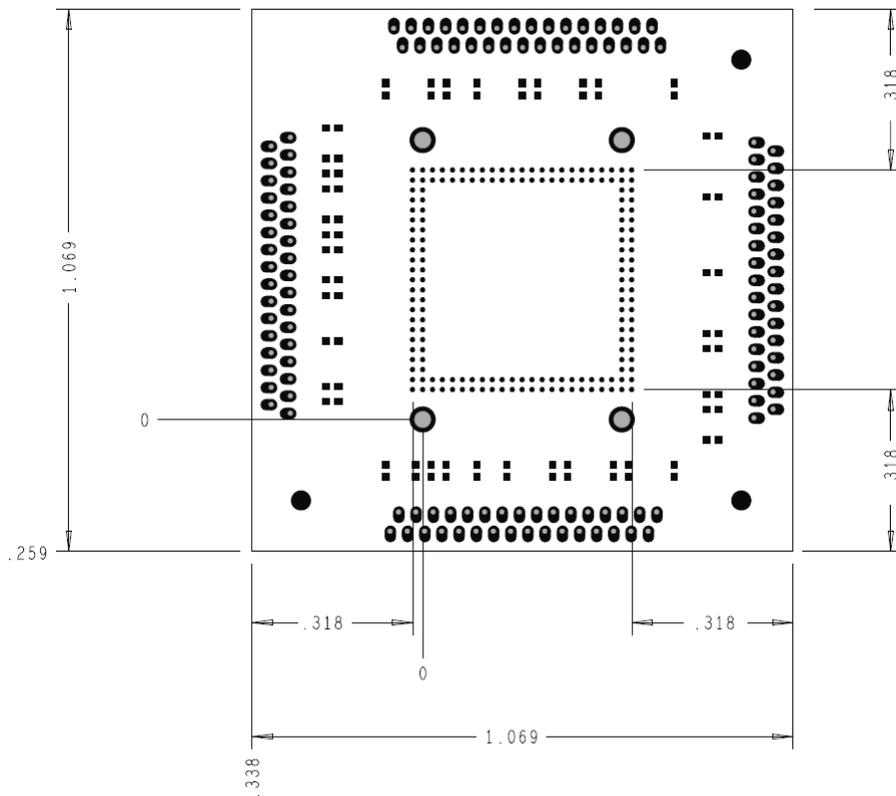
LPDDR2 168-Ball PoP Oscilloscope Component Interposer Dimensions
